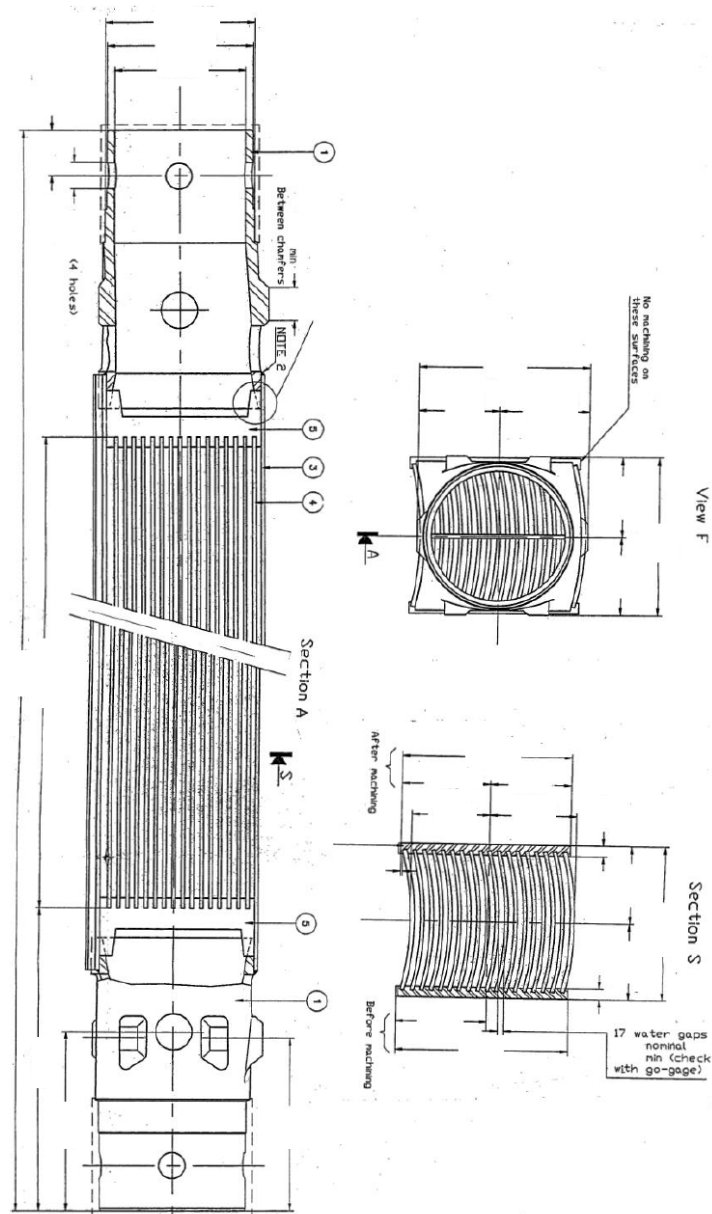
Fuel element dimensional drawing from the benchmark specifications [1].
